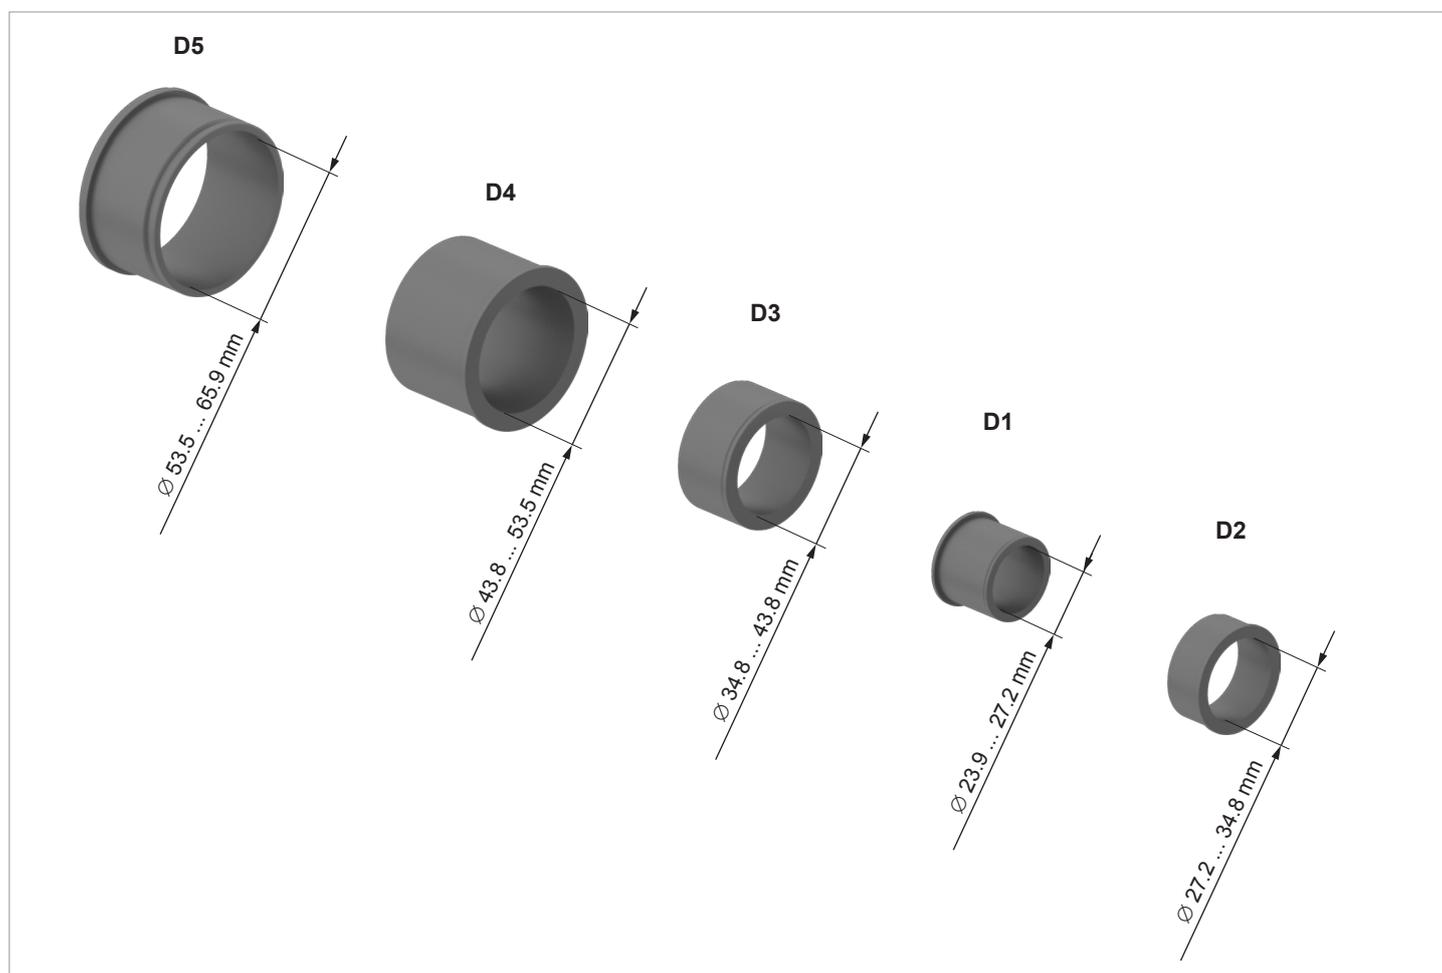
AC cable gland, dimensions of the sealing rings
